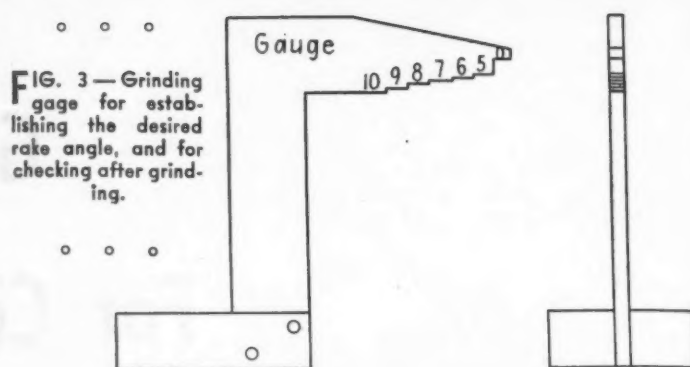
Grinding gage for establishing the desired rake angle, and for checking after grinding.
